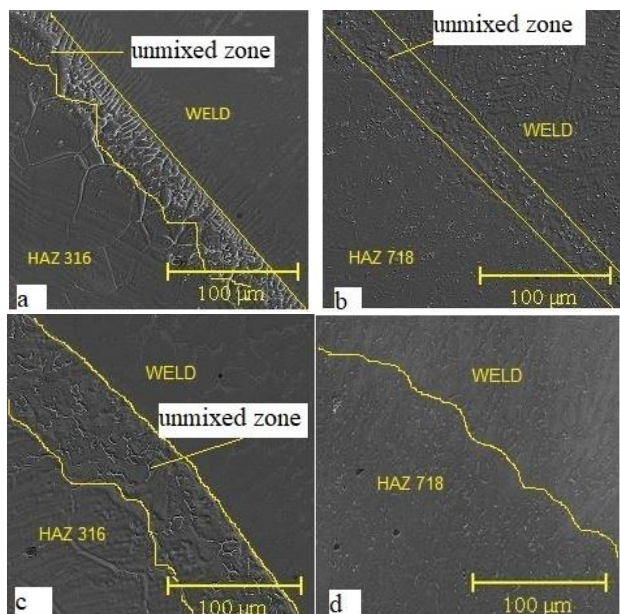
Unmixed zone a And b: Inconel 625 Filler Metal c And d: Inconel 718 Filler Metal
